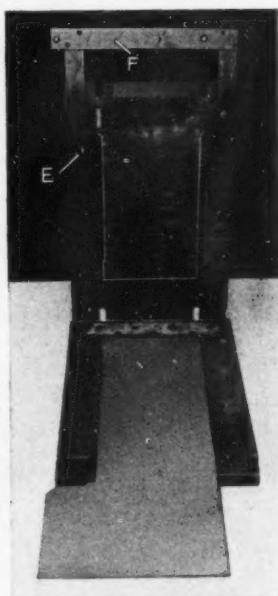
A Large Blank in 16 s.w.g. Mild Steel is Made in Two Stages by means of Crosland Tools. The Tool for the Second Stage is Here Shown, with a Workpiece
